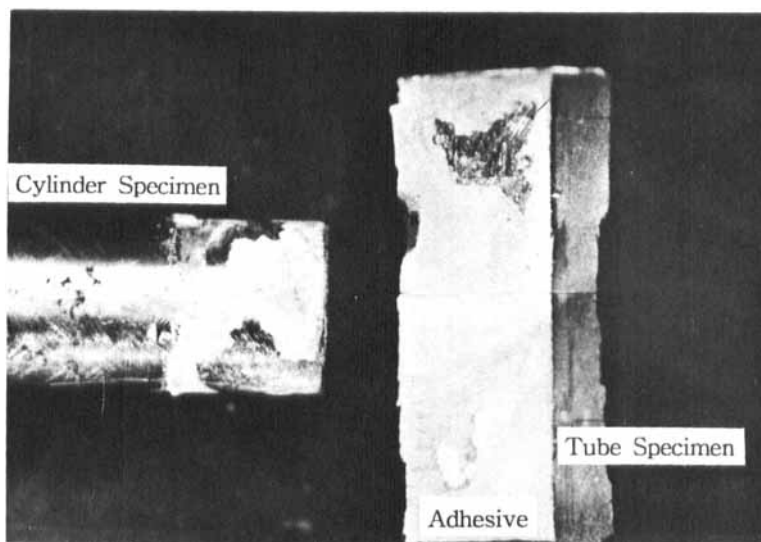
Photograph of the fracture surface of the adhesive joint.
